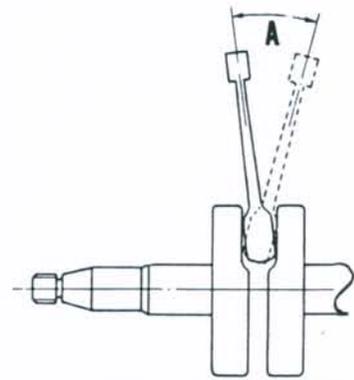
Move connecting rod small end side-to-side to determine connecting rod, bearing and crankpin wear. Maximum allowable small end play (A) is 5.0 mm (0.197 in.).
